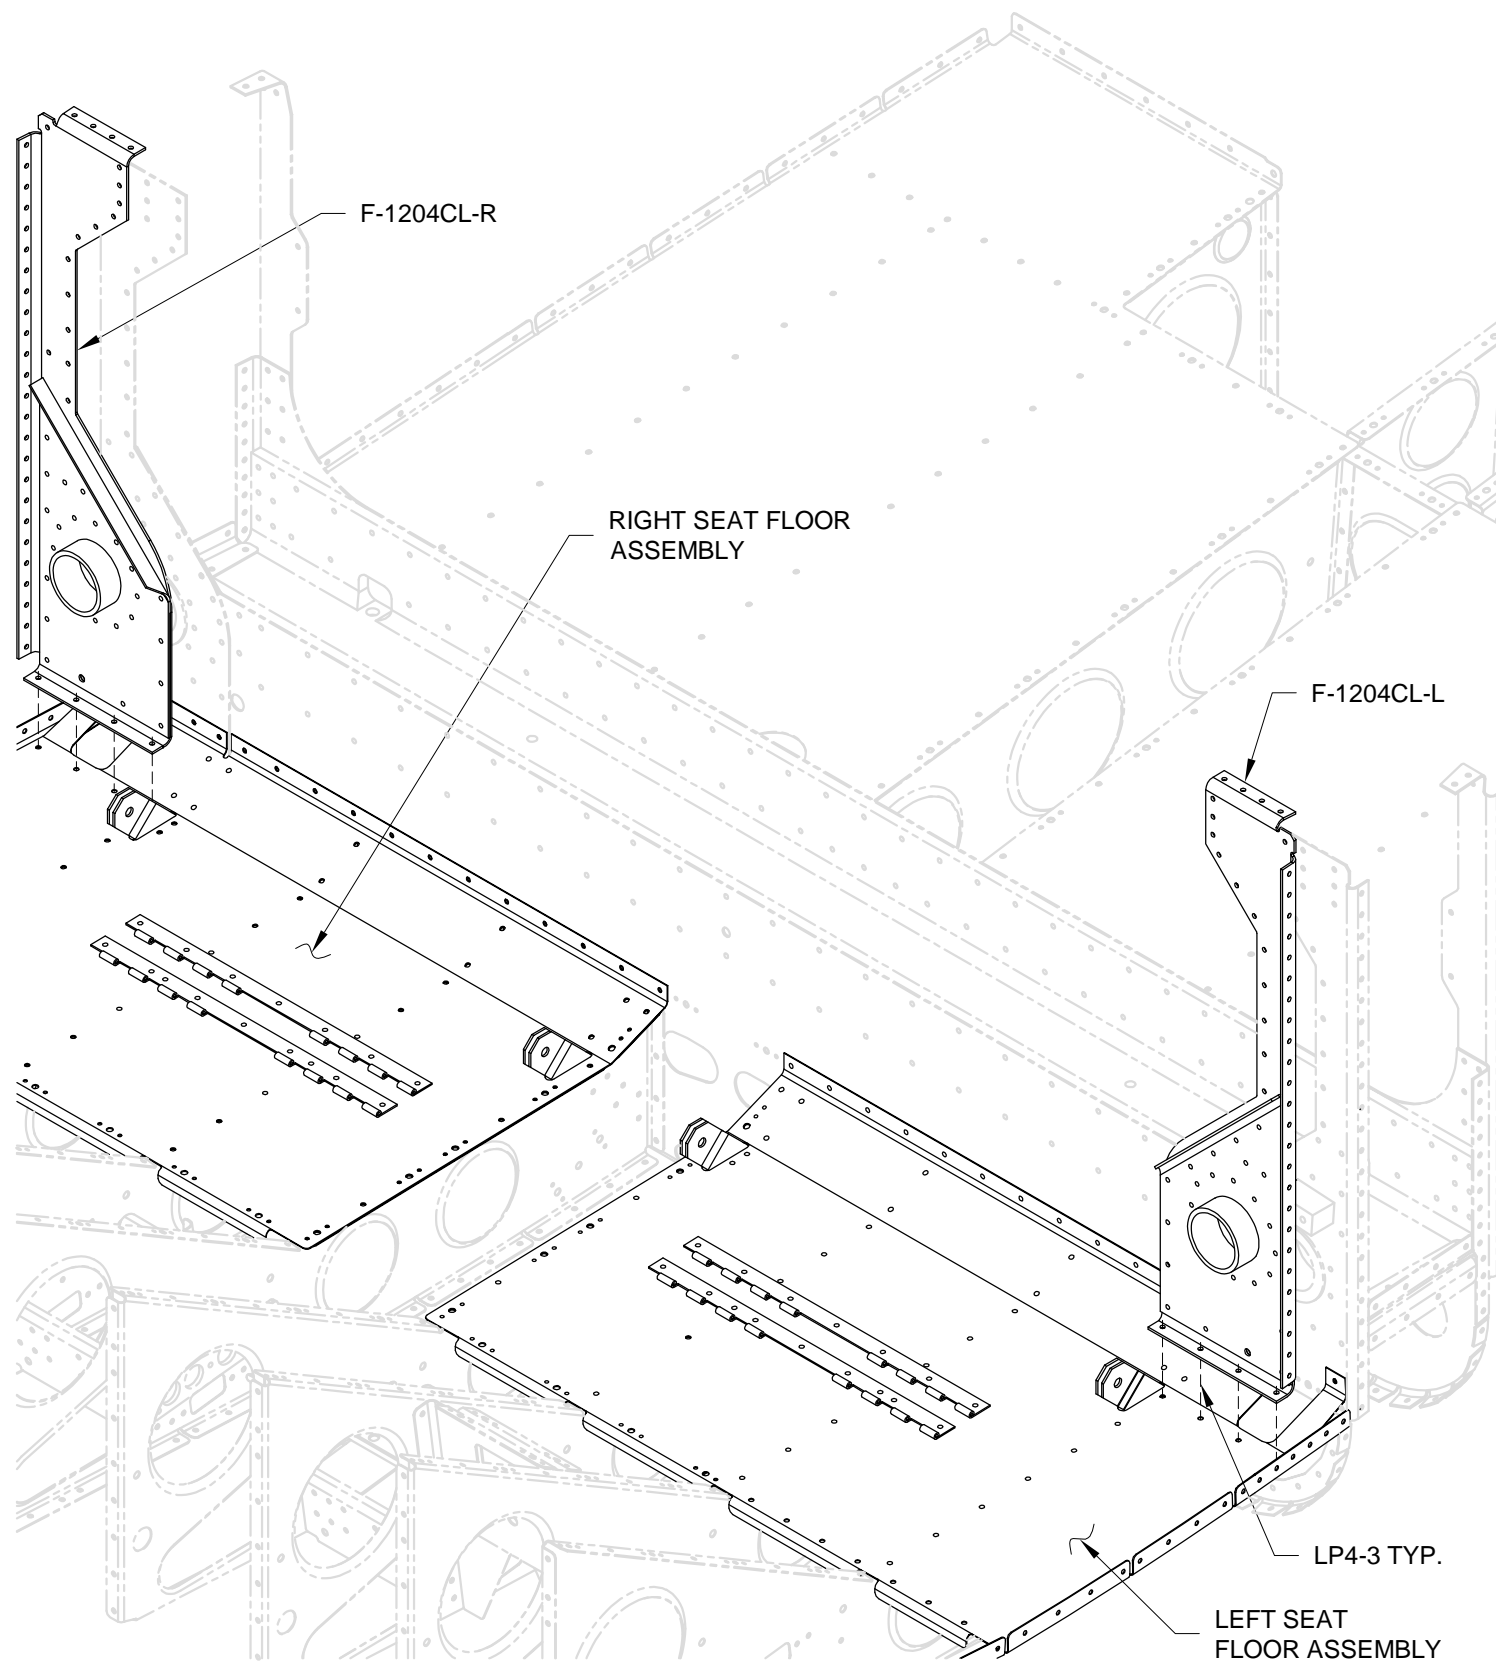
RIVETING THE FORWARD UPRIGHT ASSEMBLIES
